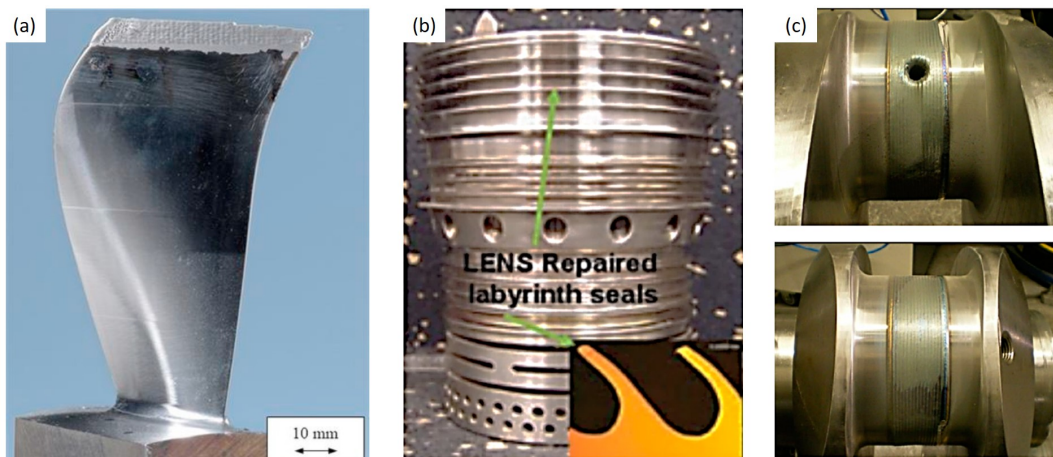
Examples of repair for (a) turbine blade in Inconel 718 [95], (b) Inconel 718 compressor seal [98] and (c) crankshaft segment [99].
